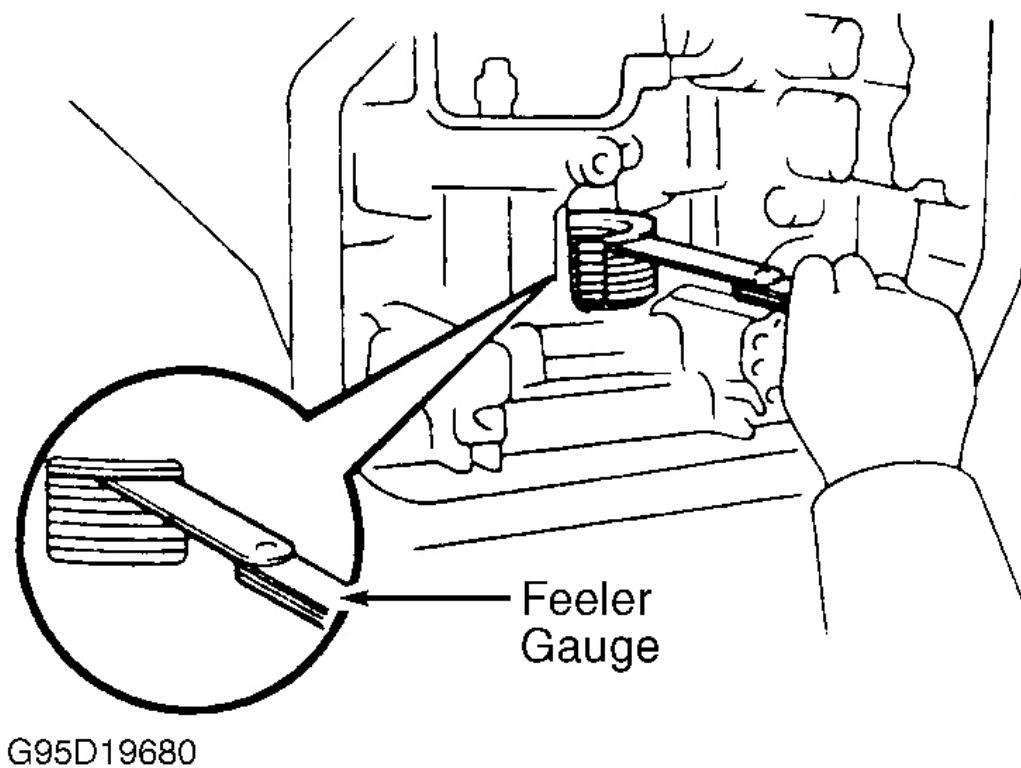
Check 1st & Reverse Brake Clutch Pack Clearance
